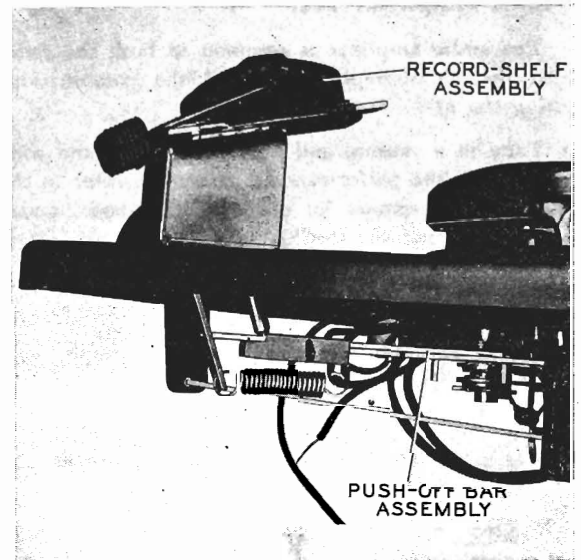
RECORD-SHELF AND PUSH-OFF ASSEMBLIES
